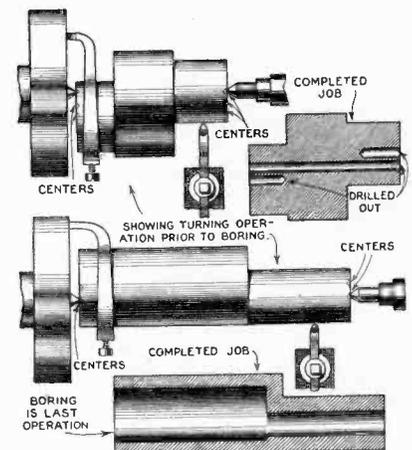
Eccentric parts should be turned first and drilled and bored afterwards. Try it and see the difference.
